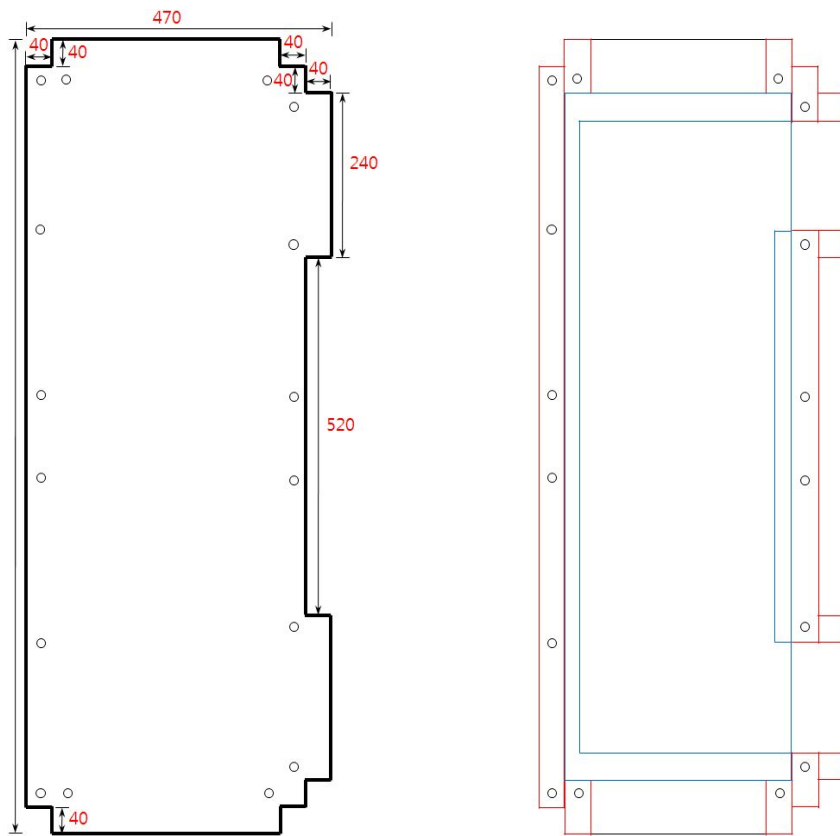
Acrylic frame for fixing the heat exchanger element
